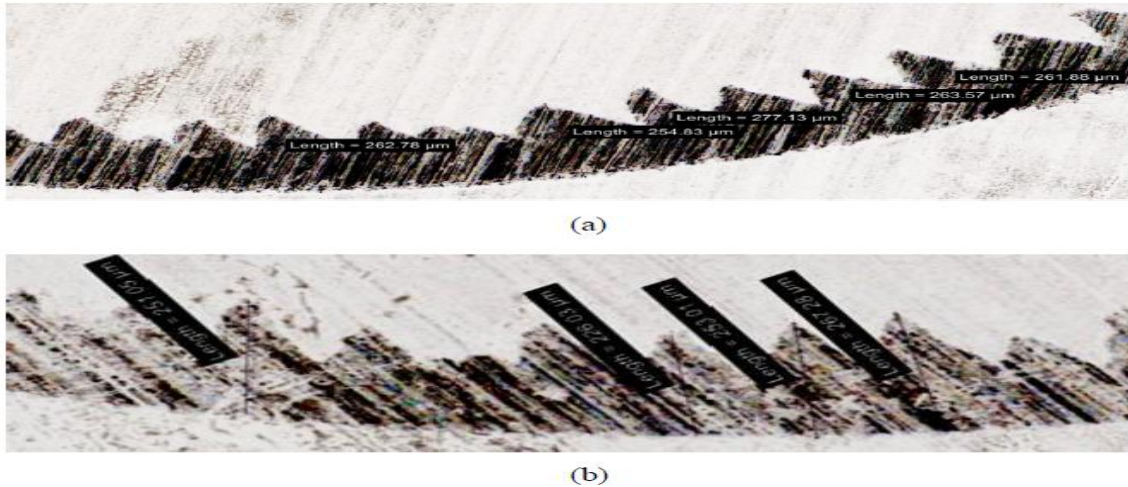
Chip cross-section for roughing tool: (a) Uncoated tool (b) TiB₂ coated tool
